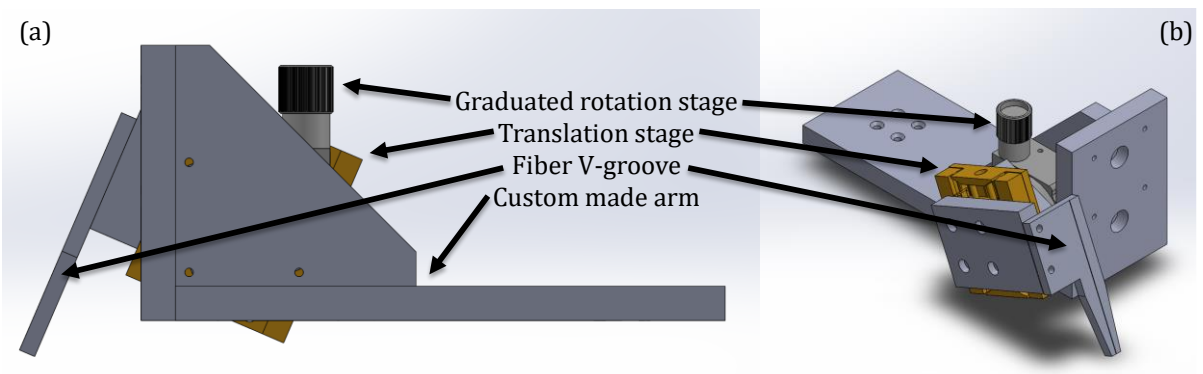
SolidWorks schematic of the rotating arm, (a) front view and (b) isometric view
